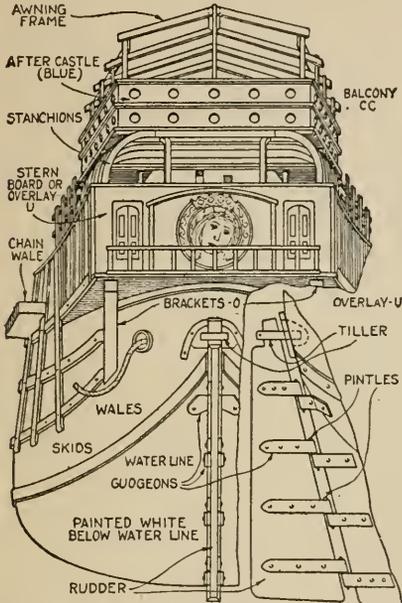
Comparing this view with Fig. 29 will make clear the stern construction.
